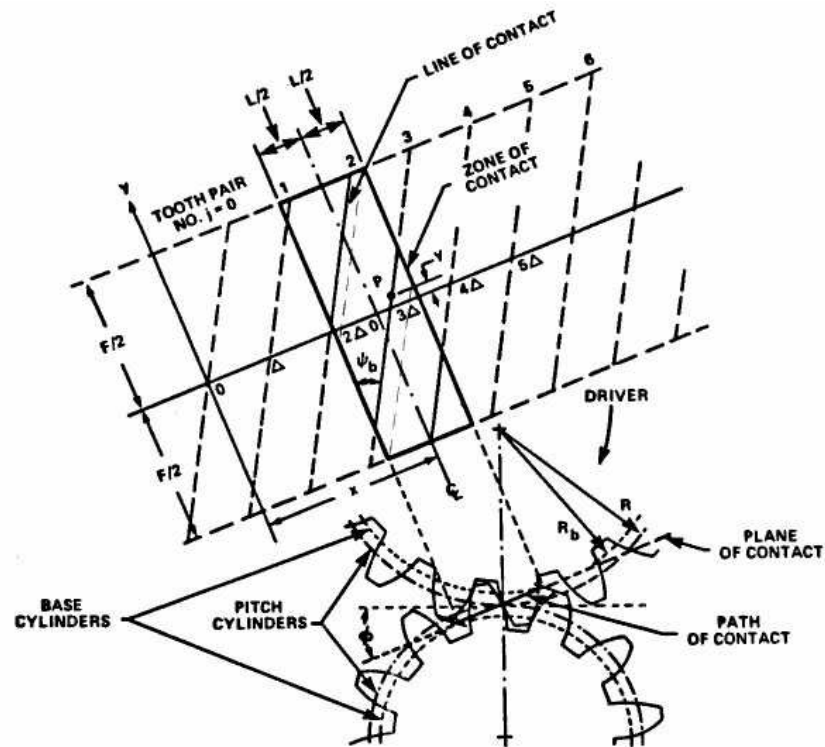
Standard gear diagram showing the analysis gear below and the mating gear above it. The base plane projection of this helical gear pair is shown above the mating gears. From Mark [5].
